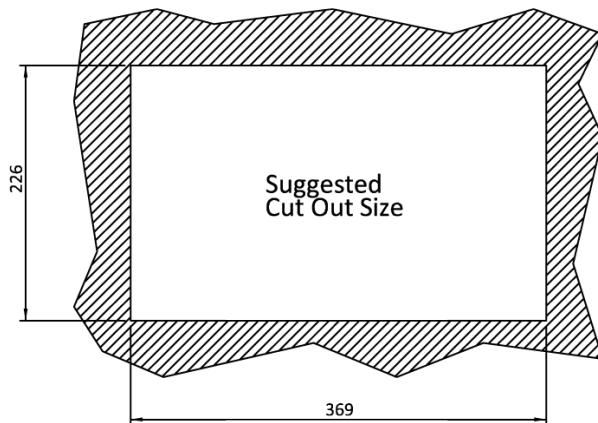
AFL3-W15B-H81 Cutout Dimensions
